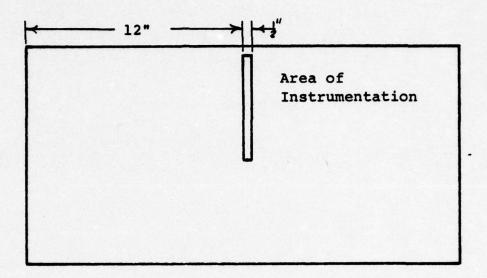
Location of Instrumentation on HY-130 Specimen I and 1020 Steel
